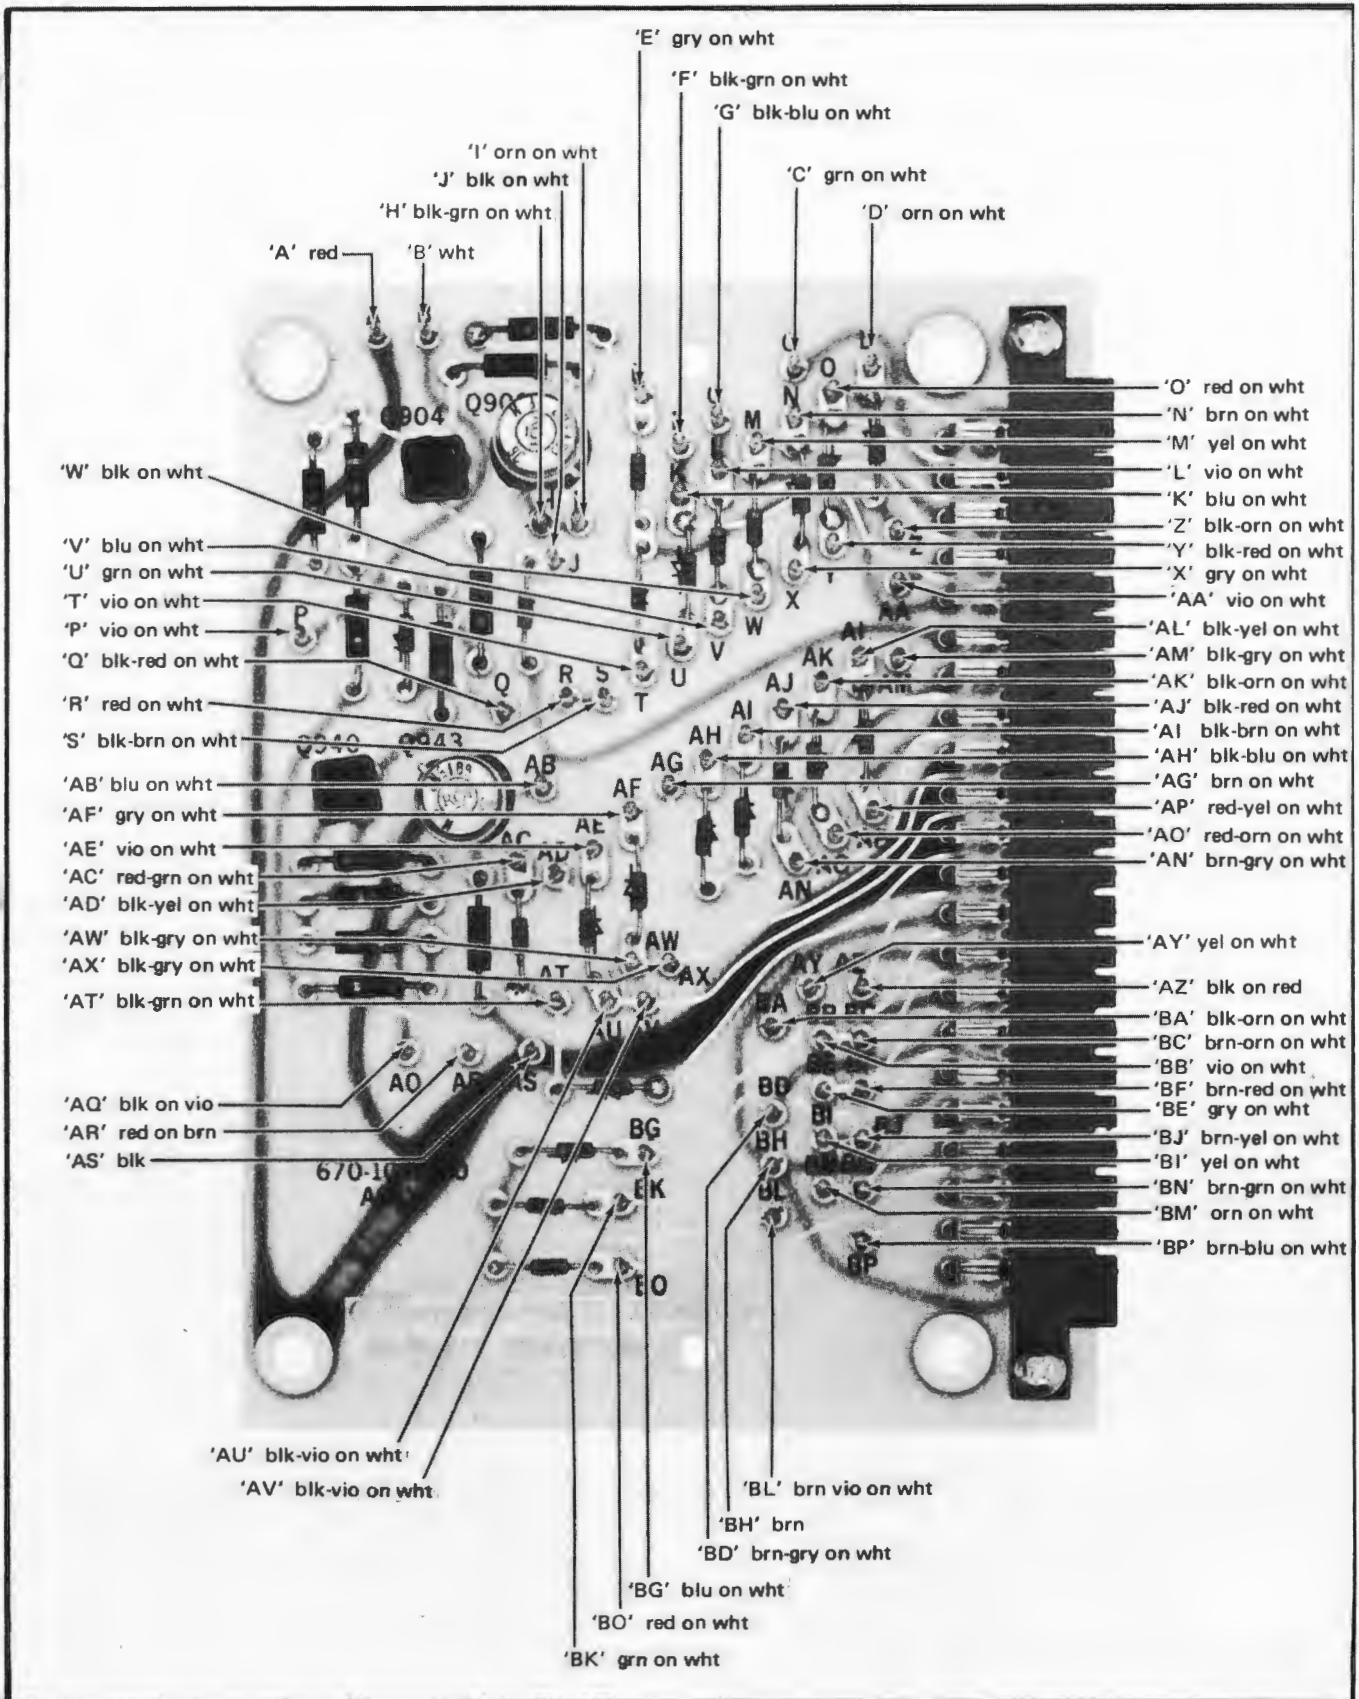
Wiring color codes on Readout Interconn circuit board.
